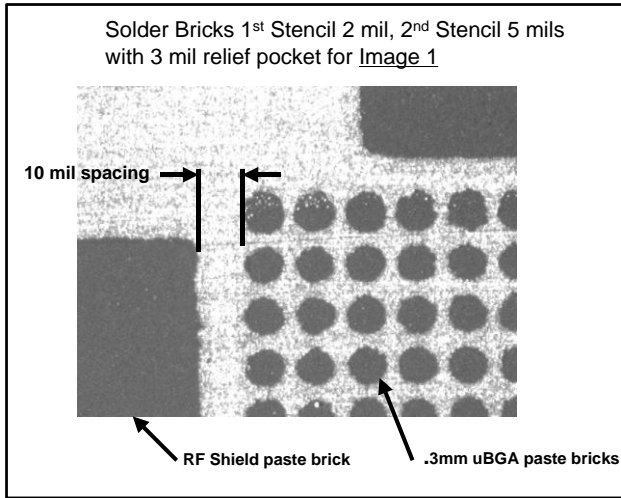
3 mm uBGA solder bricks 2 mil with 5 mil
